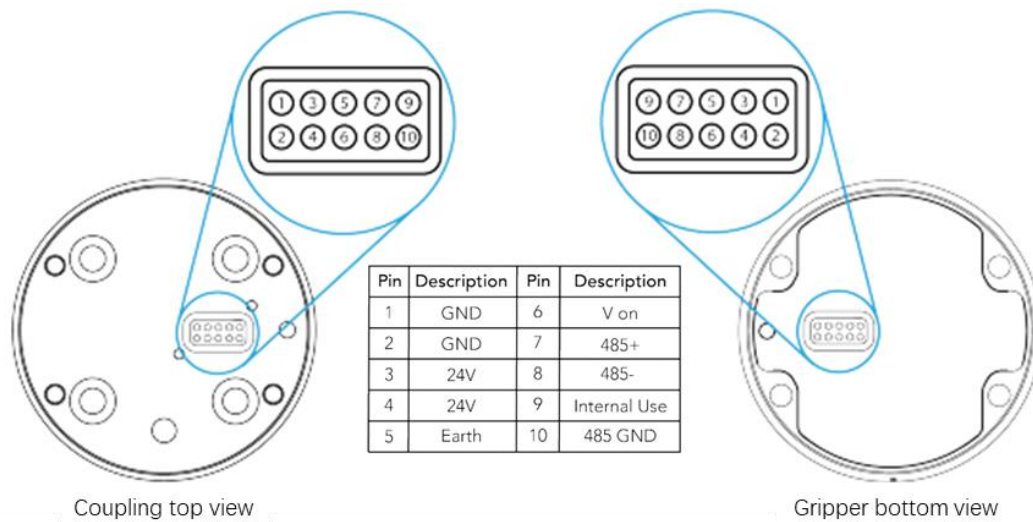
Pinout of EPick cable-to-arm coupling.
